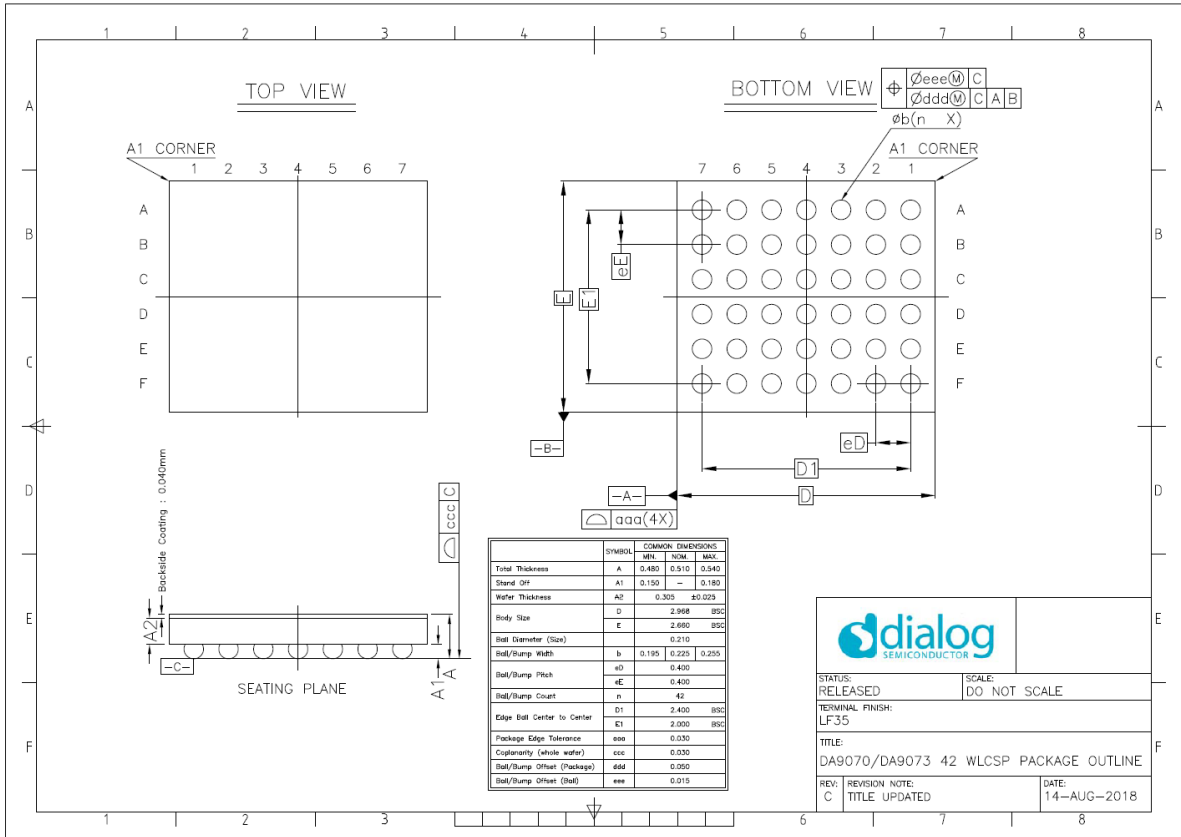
WLCSP-42 Package Outline Drawing, V3 Version
